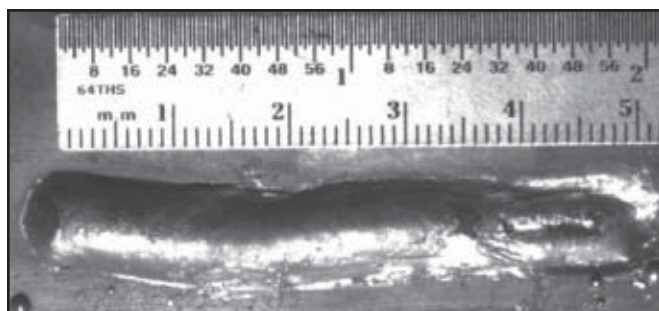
Weld bead after pulsed weld over 0.15-mm paint contamination.
